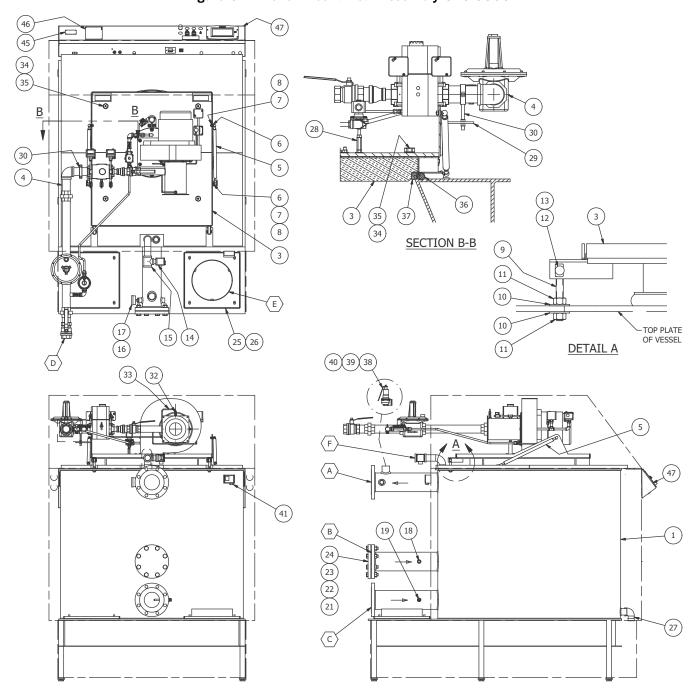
Boiler Mechanical Assembly CFC 3300
